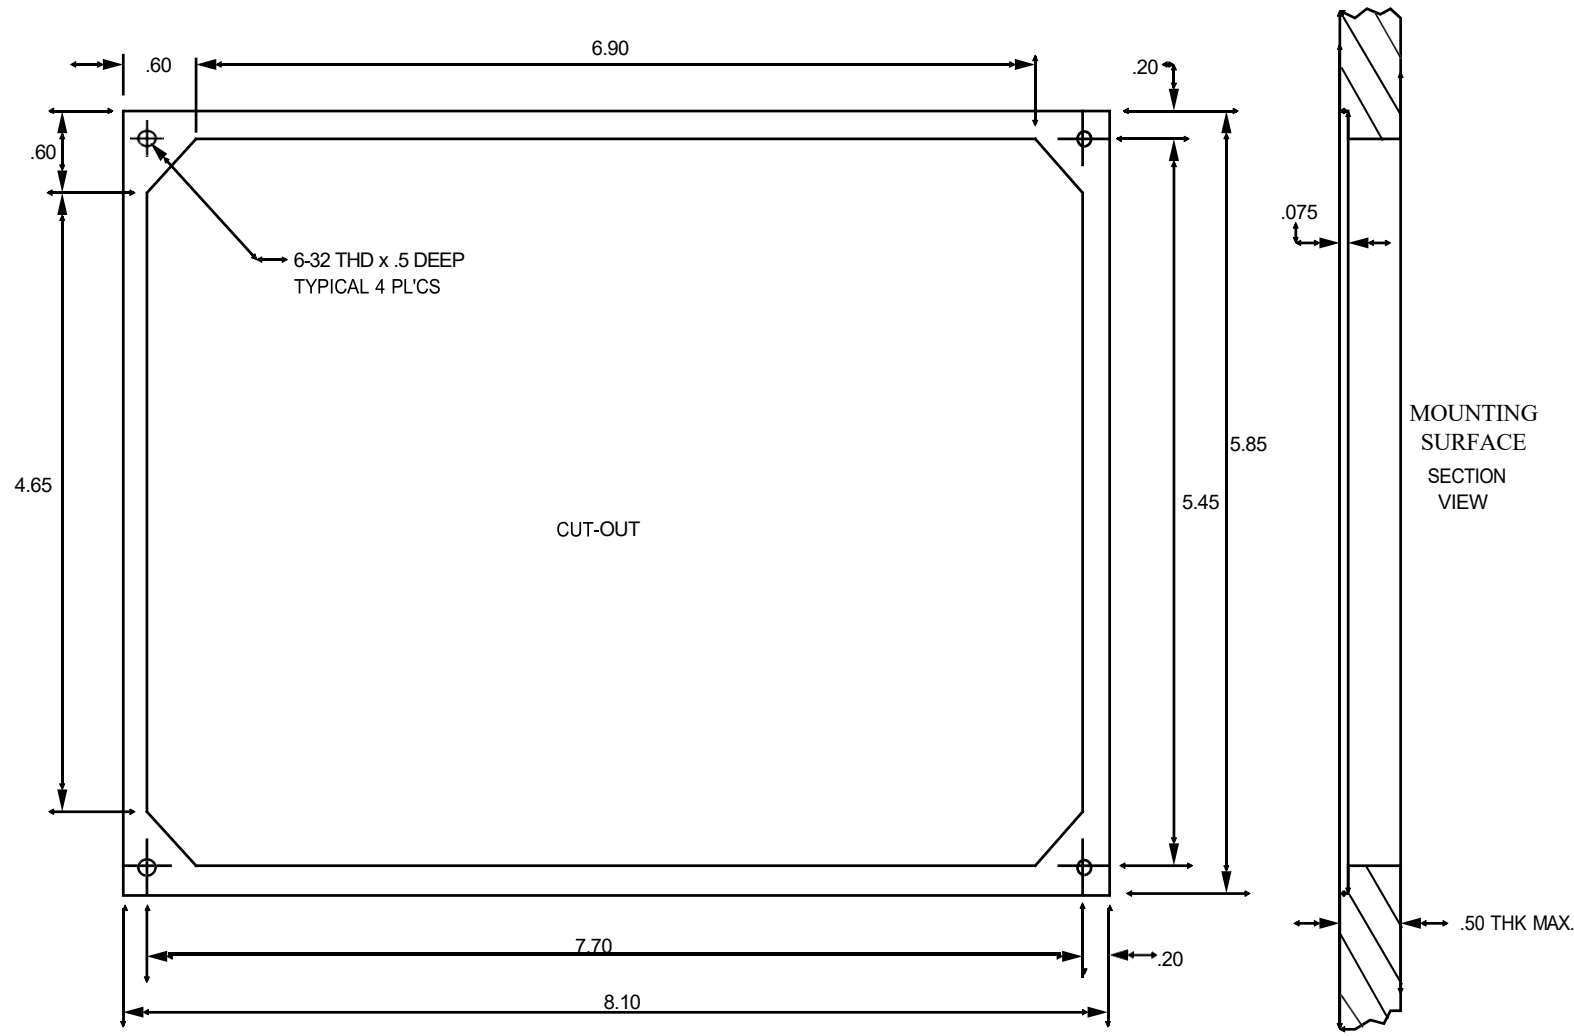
Recommended Mounting Pattern for the Remote Panel
